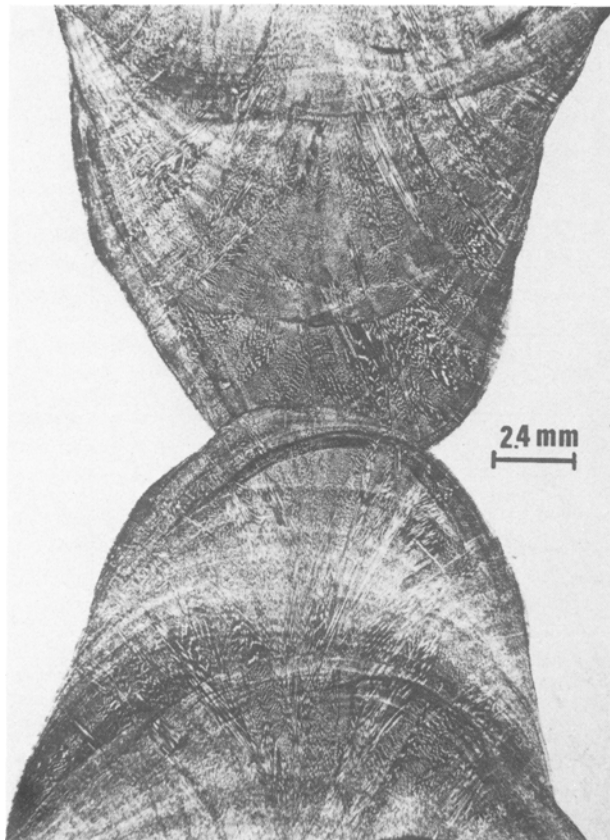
Optical micrograph of a section of welded joint of 10Cr-17.5Mn austenitic steel plates.
